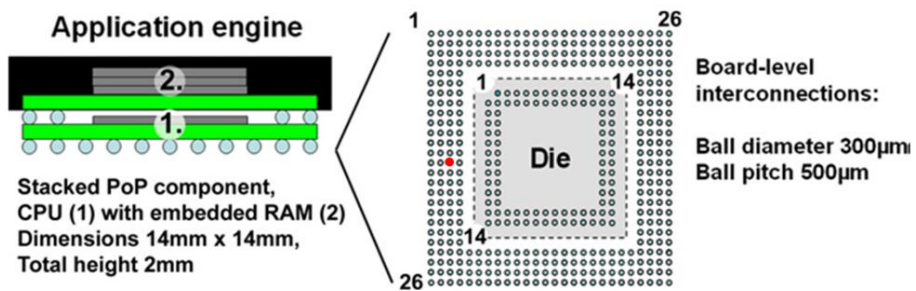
Predicted location of the critical solder interconnection of a stacked package-on-package component under operational power cycling.
